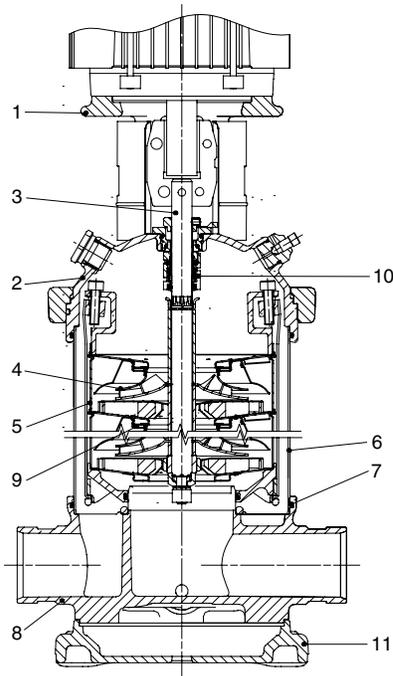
Sectional drawing of CRN 5, 10, 15, 20 SF
